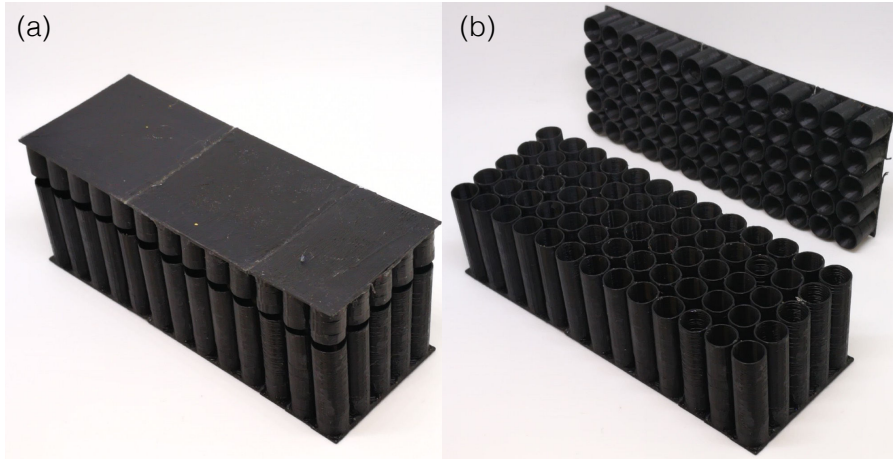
3D Printed optimal experimental sample: (a) assembled test block; (b) test block parts.
